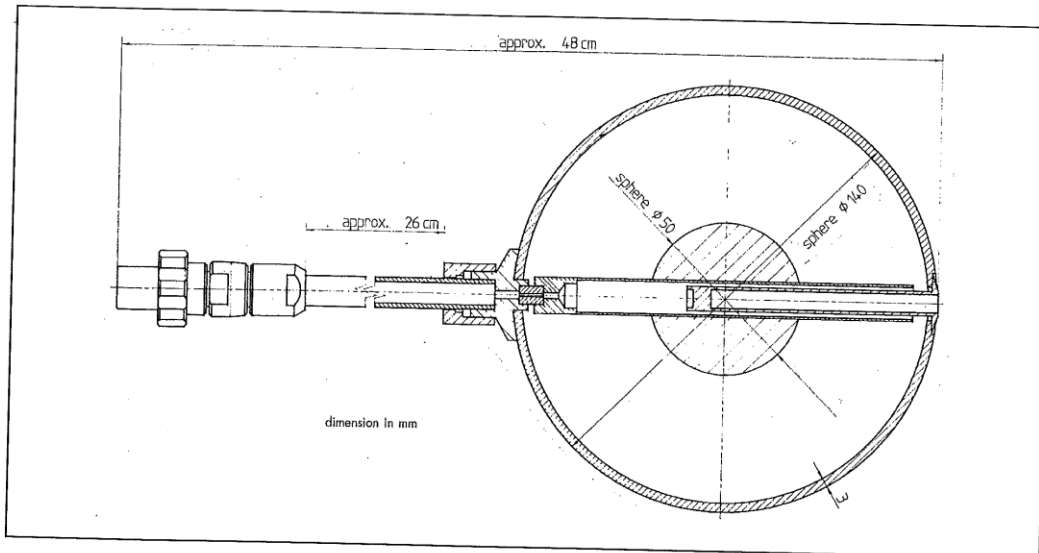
Spherical chamber type 32002 (dimensions in mm)
